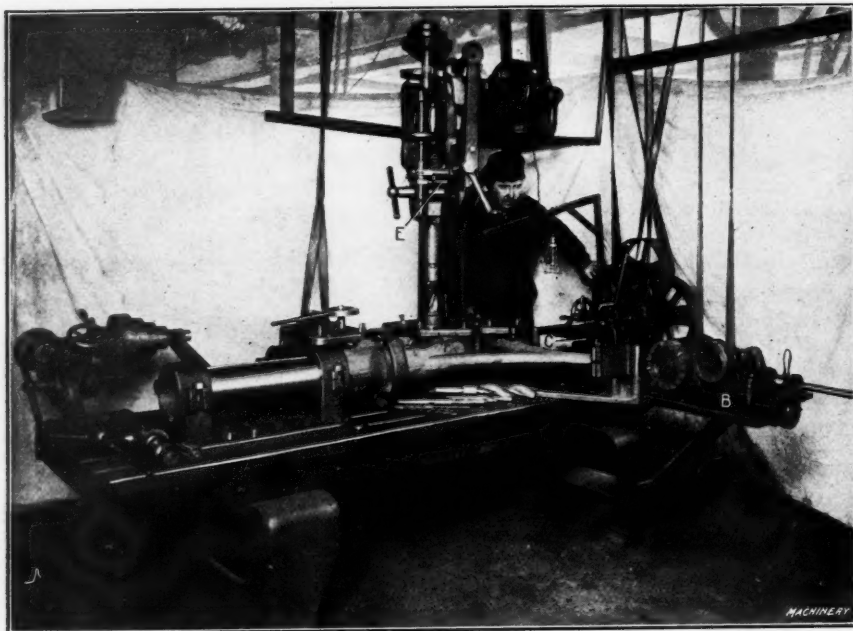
Special Machine for drilling and milling Columns for Upright Drilling Machines
